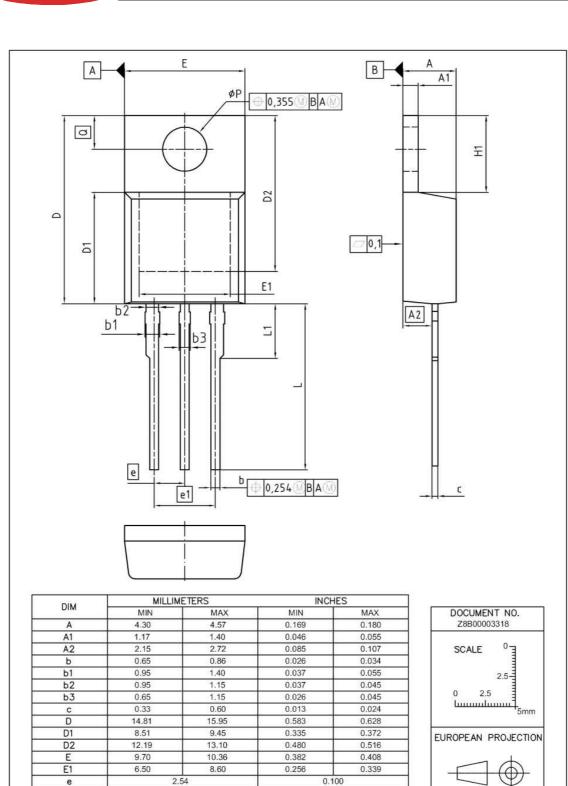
Outline PG-TO 220, dimensions in mm/inches
